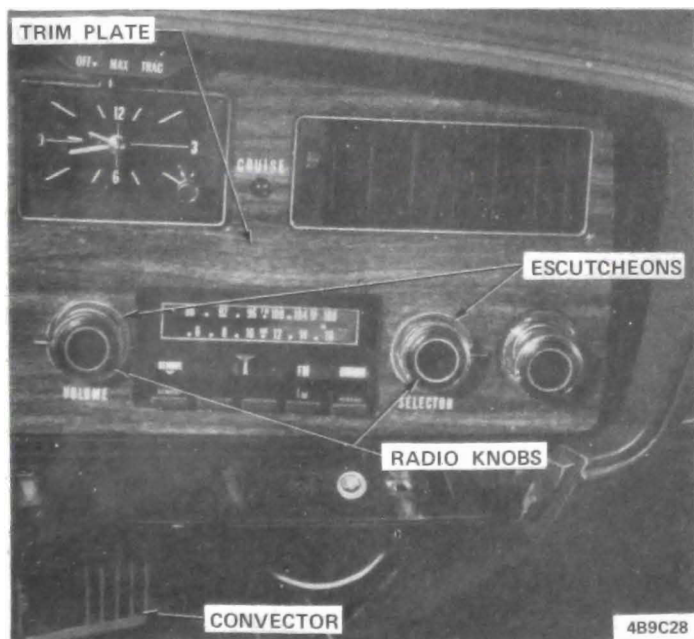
C-31 Convactor, Radio Knobs, Escutcheons and Trim Plate
